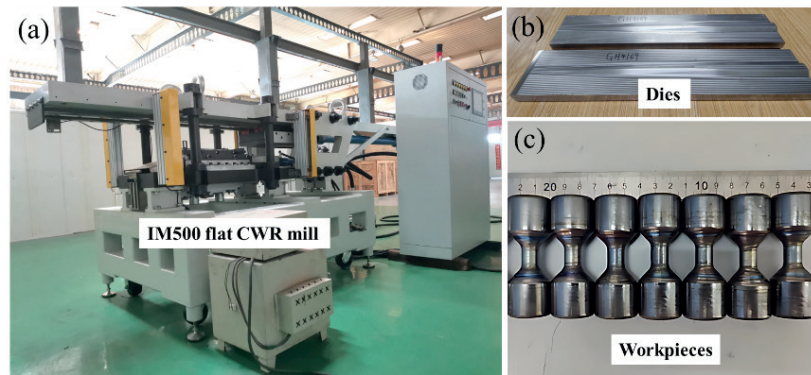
CWR experiments (a) the IM500 flat CWR mill; (b) dies; (3) workpieces
